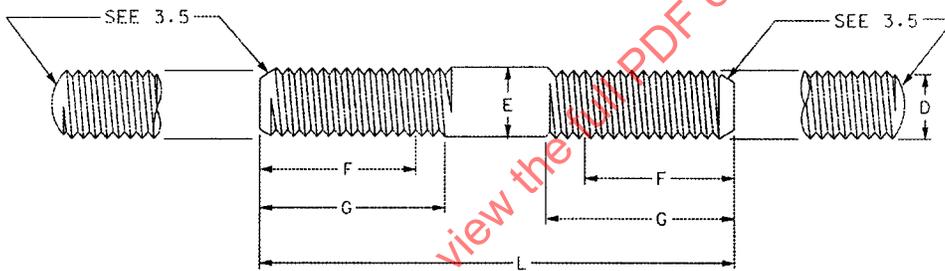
DOUBLE END STUD BOLTS—CLAMPING TYPE
